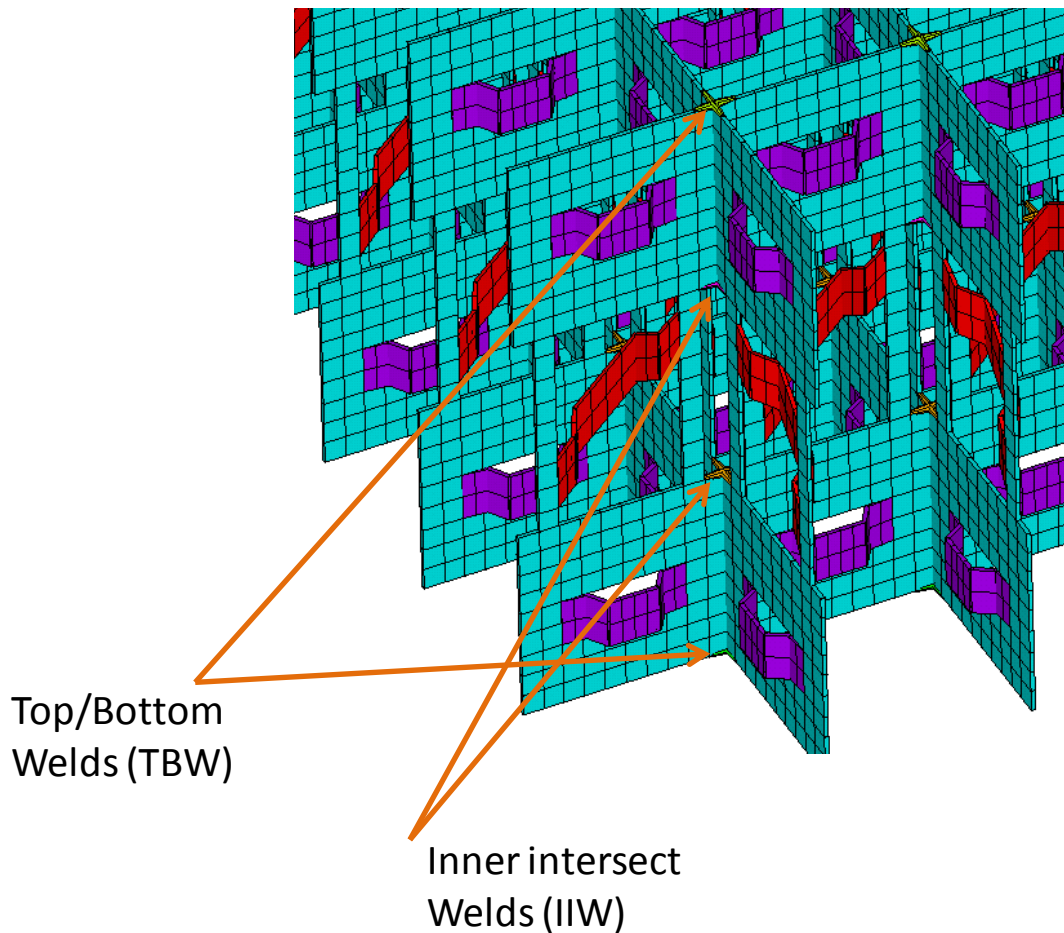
Weld nugget model and locations for the pancake-shaped weld.
